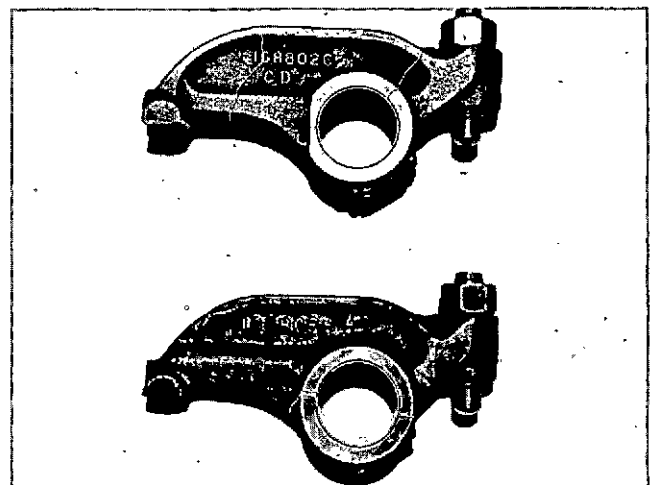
, V40305. Magnetic inspection crack indication
